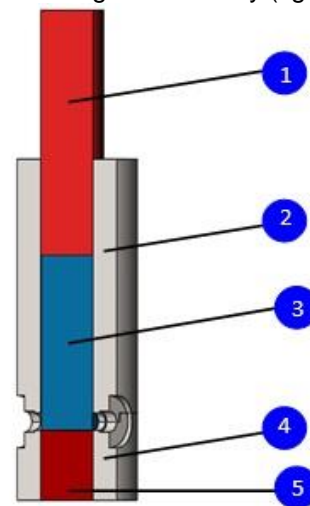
The tool for MNECAE as an assembly: 1 – punch, 2 – upper part of the container, 3 – work piece, 4 – lower part of the container, 5 – support.
